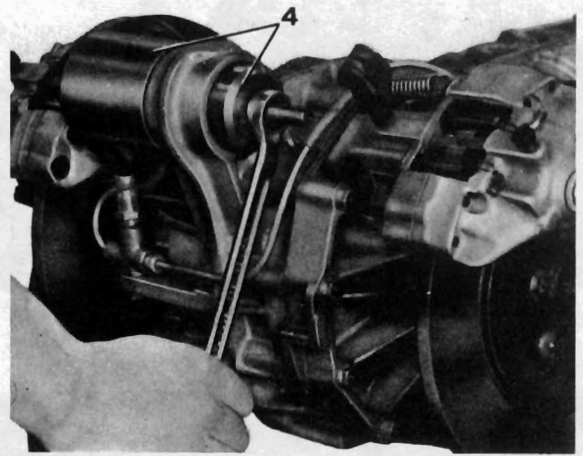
Removing final drive housing flexible mounting bush (Sec 11)
